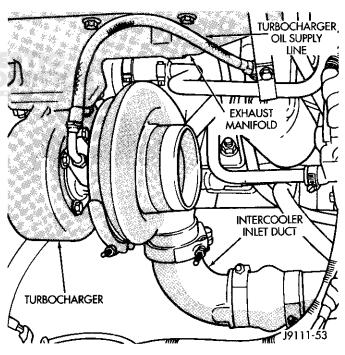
Oil Supply Line and Intercooler Inlet Duct
